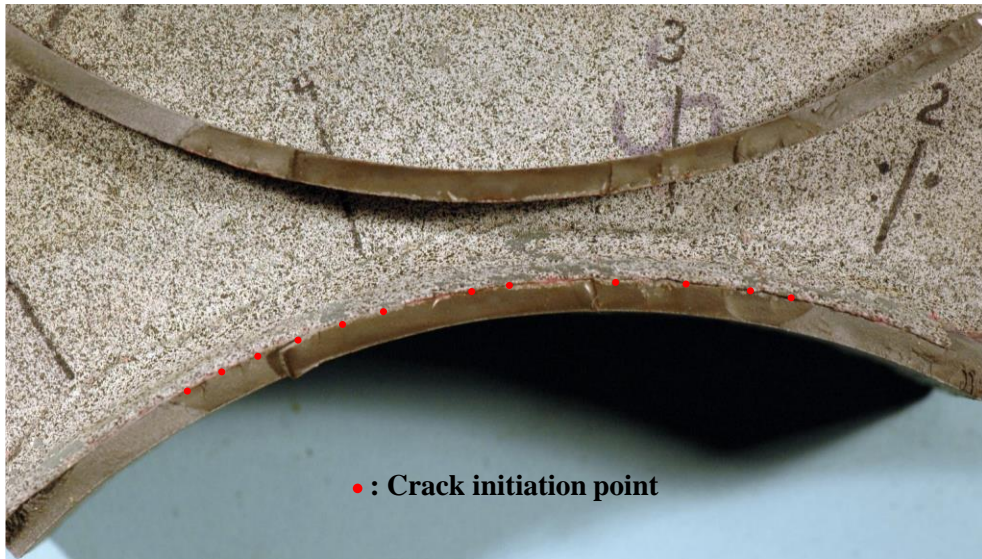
Fatigue fracture surface and identified crack initiation points in Type I-5 Arm
